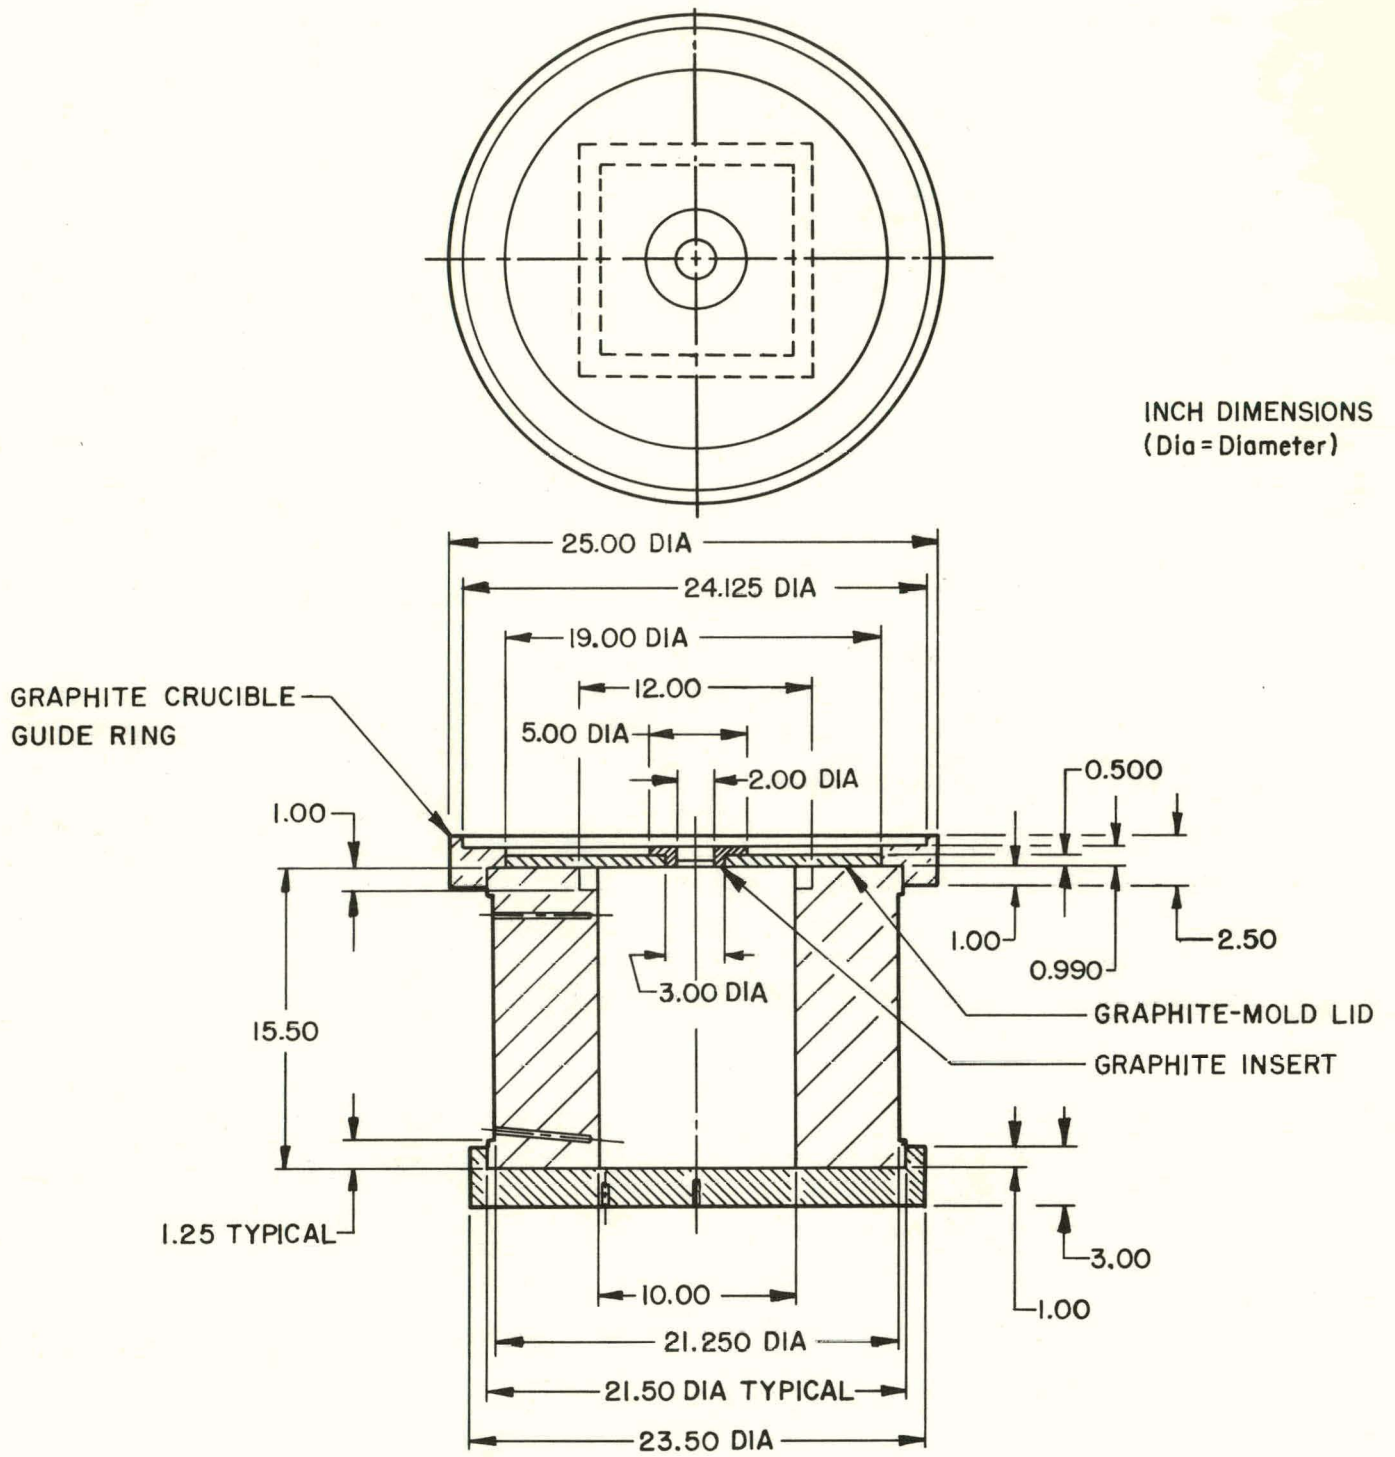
A. Large ingot-mold design used to cast 10- by 10- by 15.5-inch ingots, using the bottom-pouring technique.
